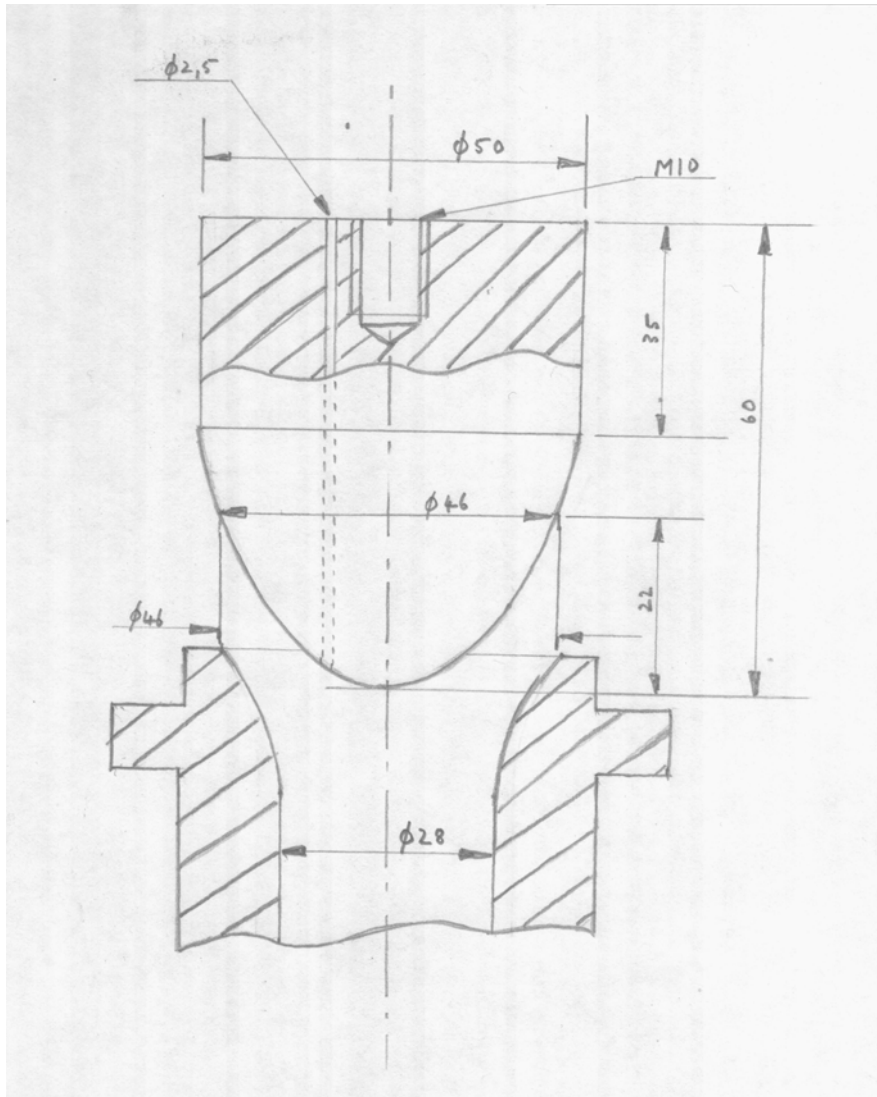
Assembly drawing of 40%-scaled stopper and SEN upper part
